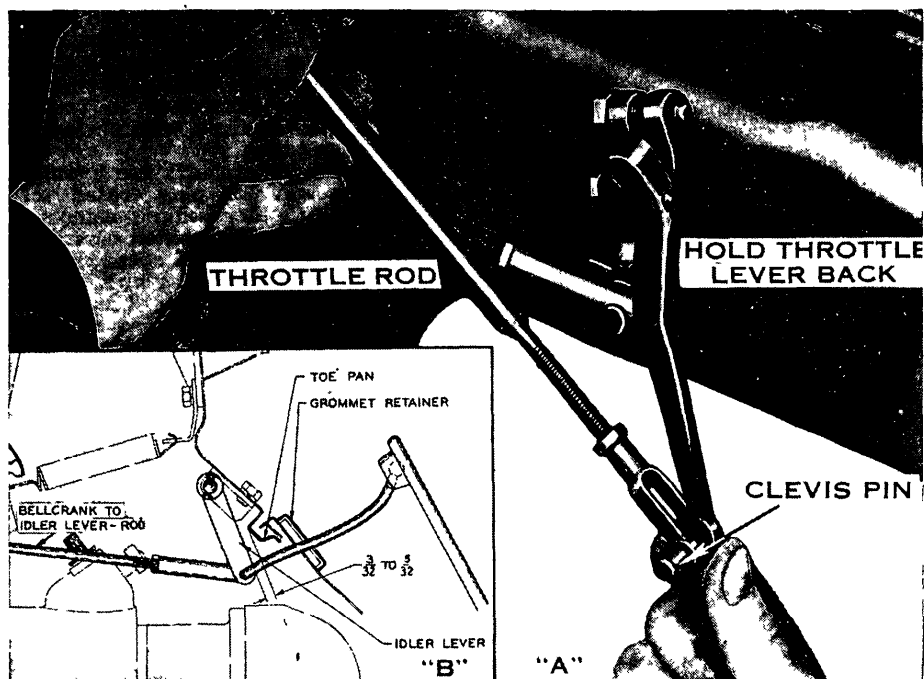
Adjusting throttle rod, 1941-48 Hydra-Matic
